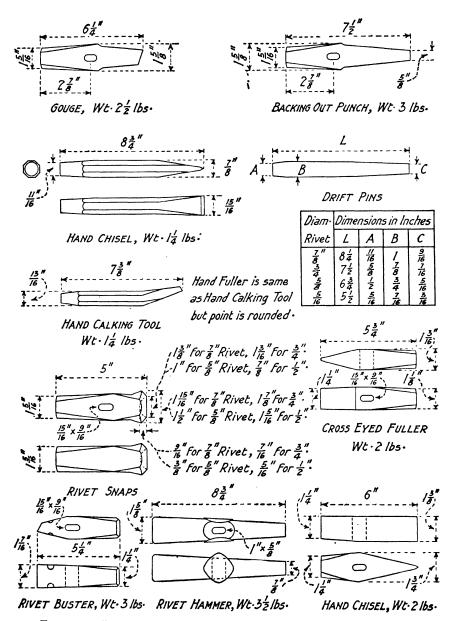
Tools for Erection of Elevated Tanks. Chicago Bridge & Iron Company.
